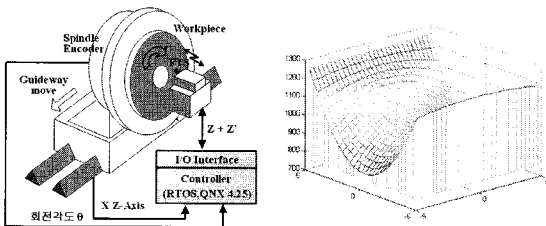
Strategy for free-form surface machining in ultra-precision diamond turning machine
